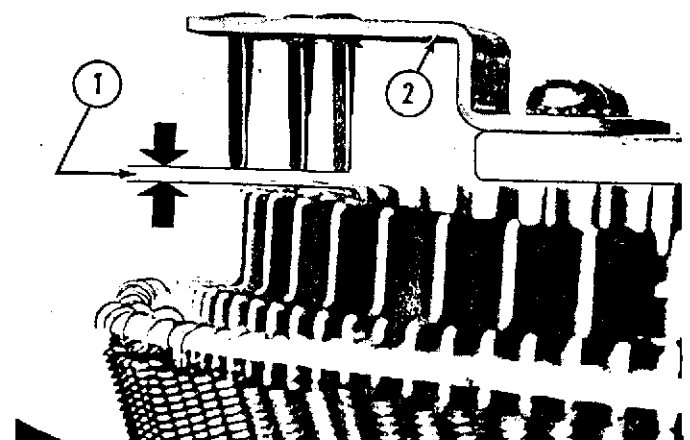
SELECTOR CRANK CLEARANCE, ADJUSTMENT
